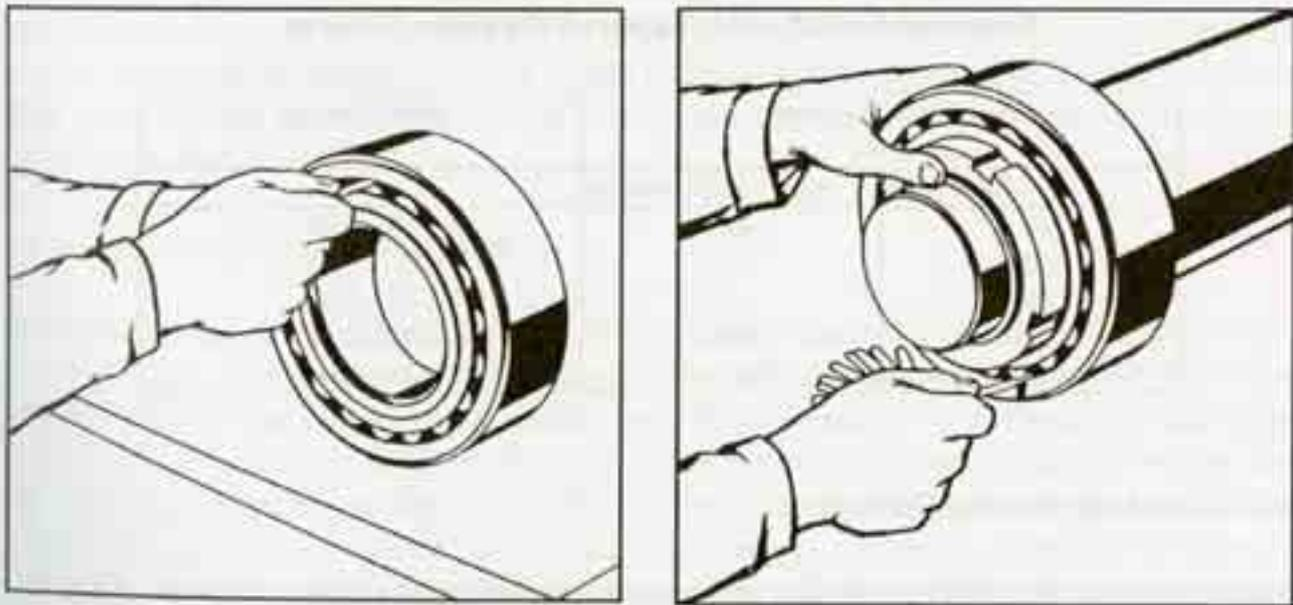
Checking Clearance of a Spherical Roller Bearing with Adapter Sleeves
